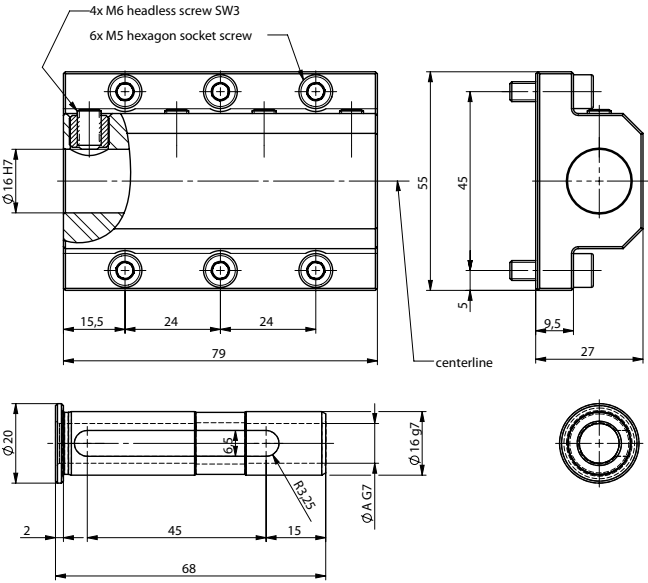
Tool holder for boring bars up to ø16 mm with reducing
